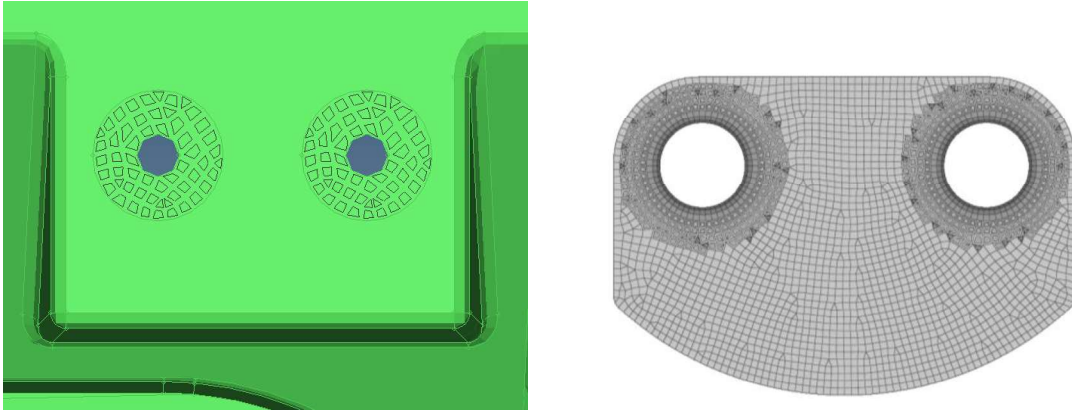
DETAIL OF THE CONTACT SURFACE DEFINITION OF A STRIKER
